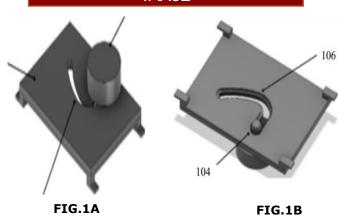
A & 1B: Illustrates perspective views of a swivel assembly of a convertible seat.
